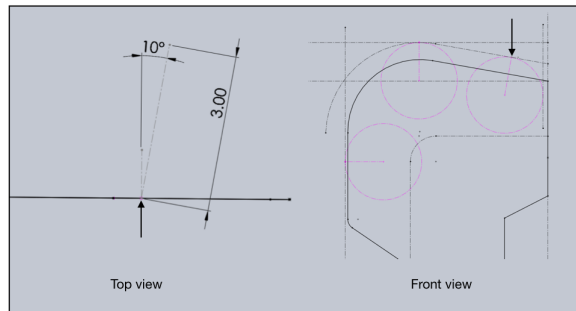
Cutter side rake angle. Dimensions in mm.
